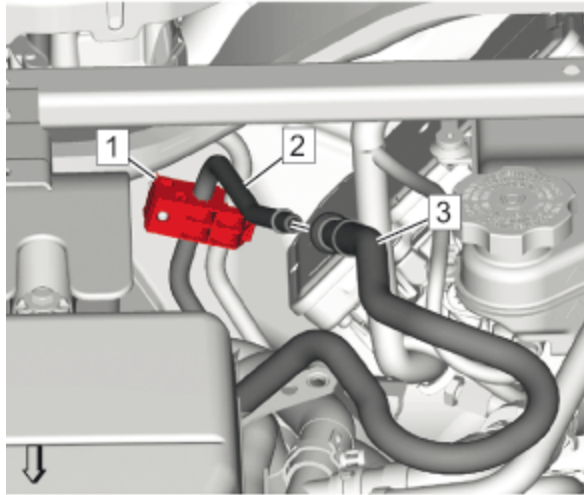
Fuel Feed Front Pipe, Fuel Feed Pipe And Retainer
